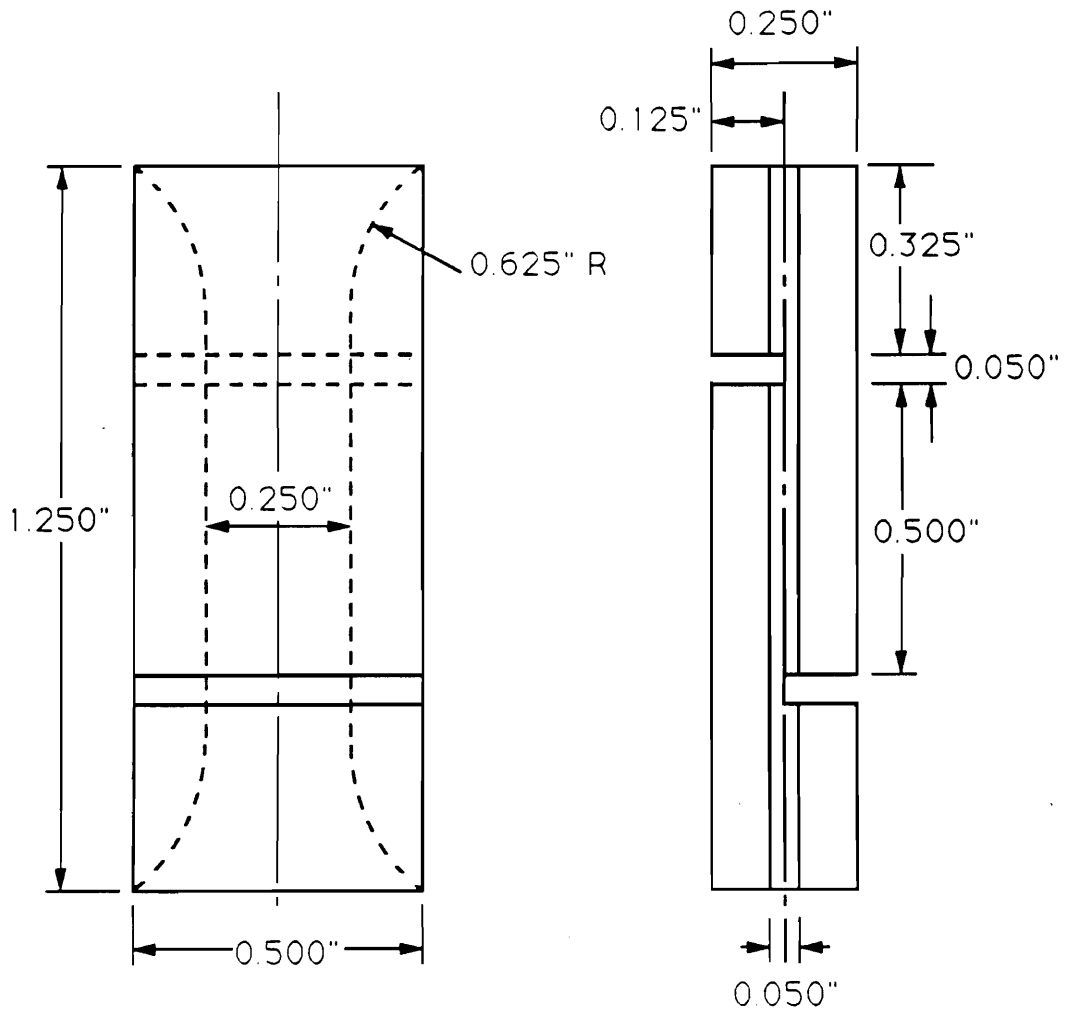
Dimensions of Interlaminar Shear Specimen
